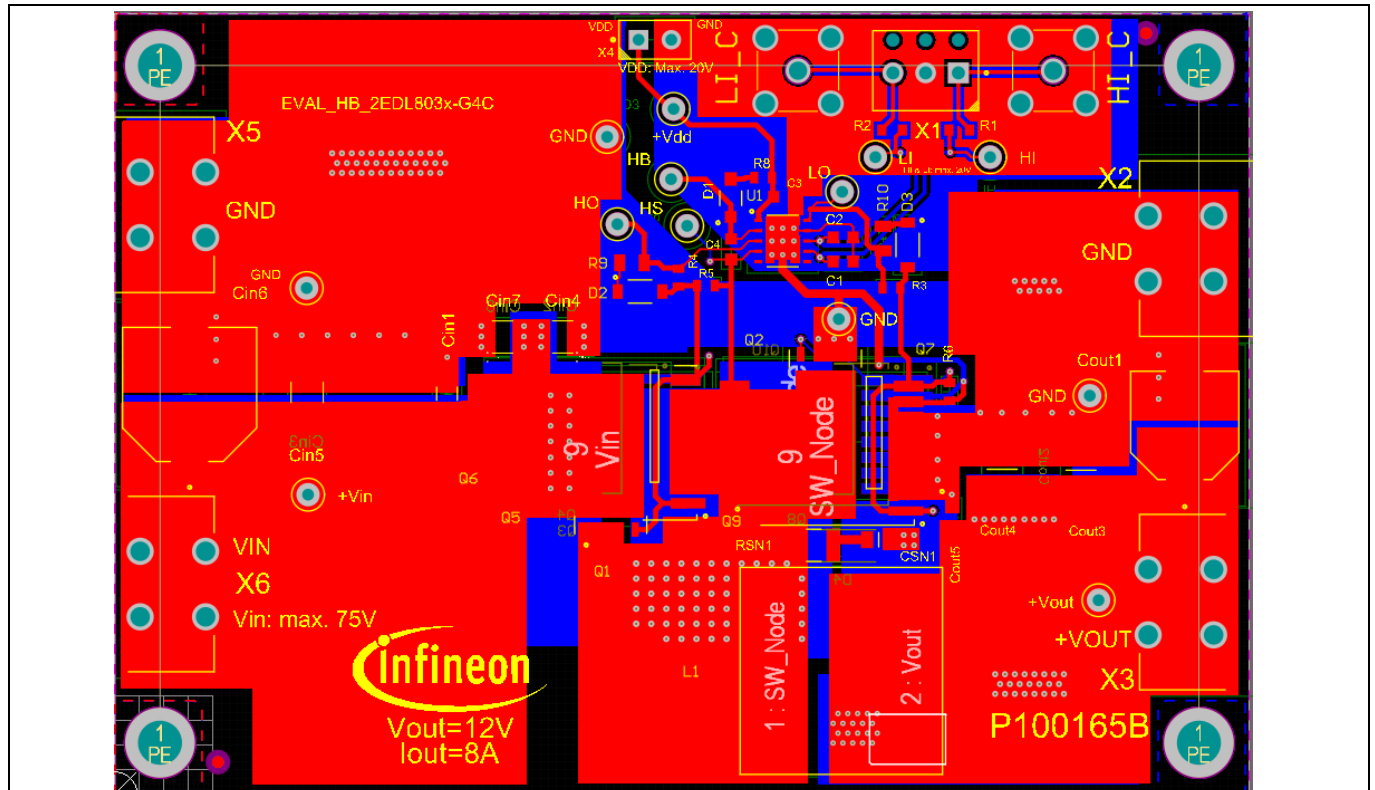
EVAL_HB_2EDL803x-G4C board layout
